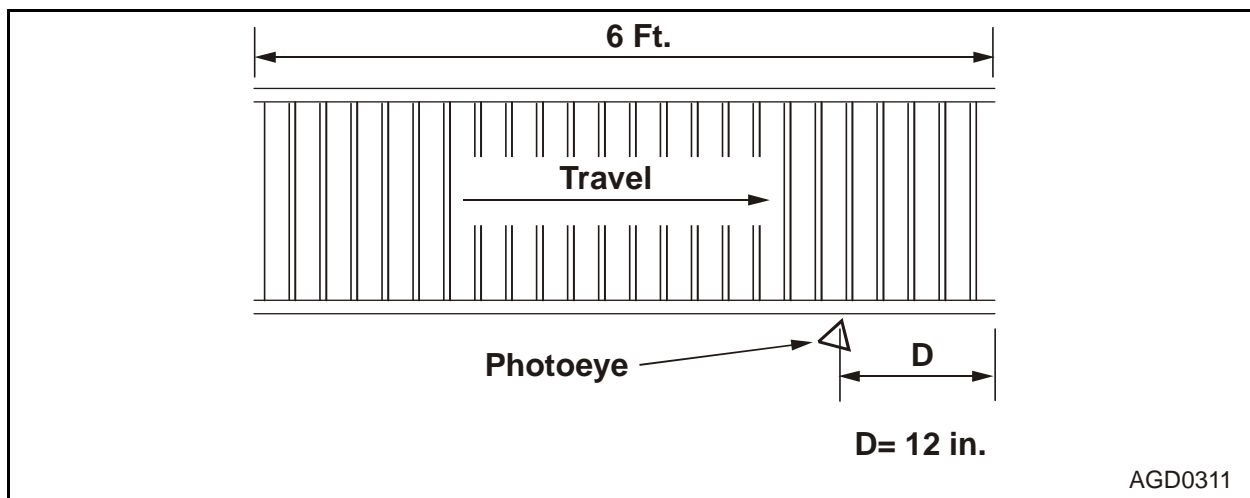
9 Photo-Eye Placement for Local Zone Control
